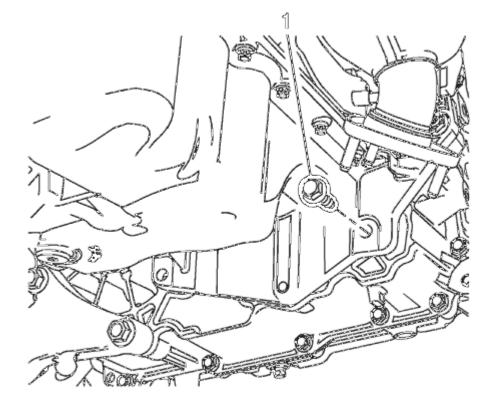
Automatic Transmission Converter Cover & Bolts Courtesy of GENERAL MOTORS COMPANY
